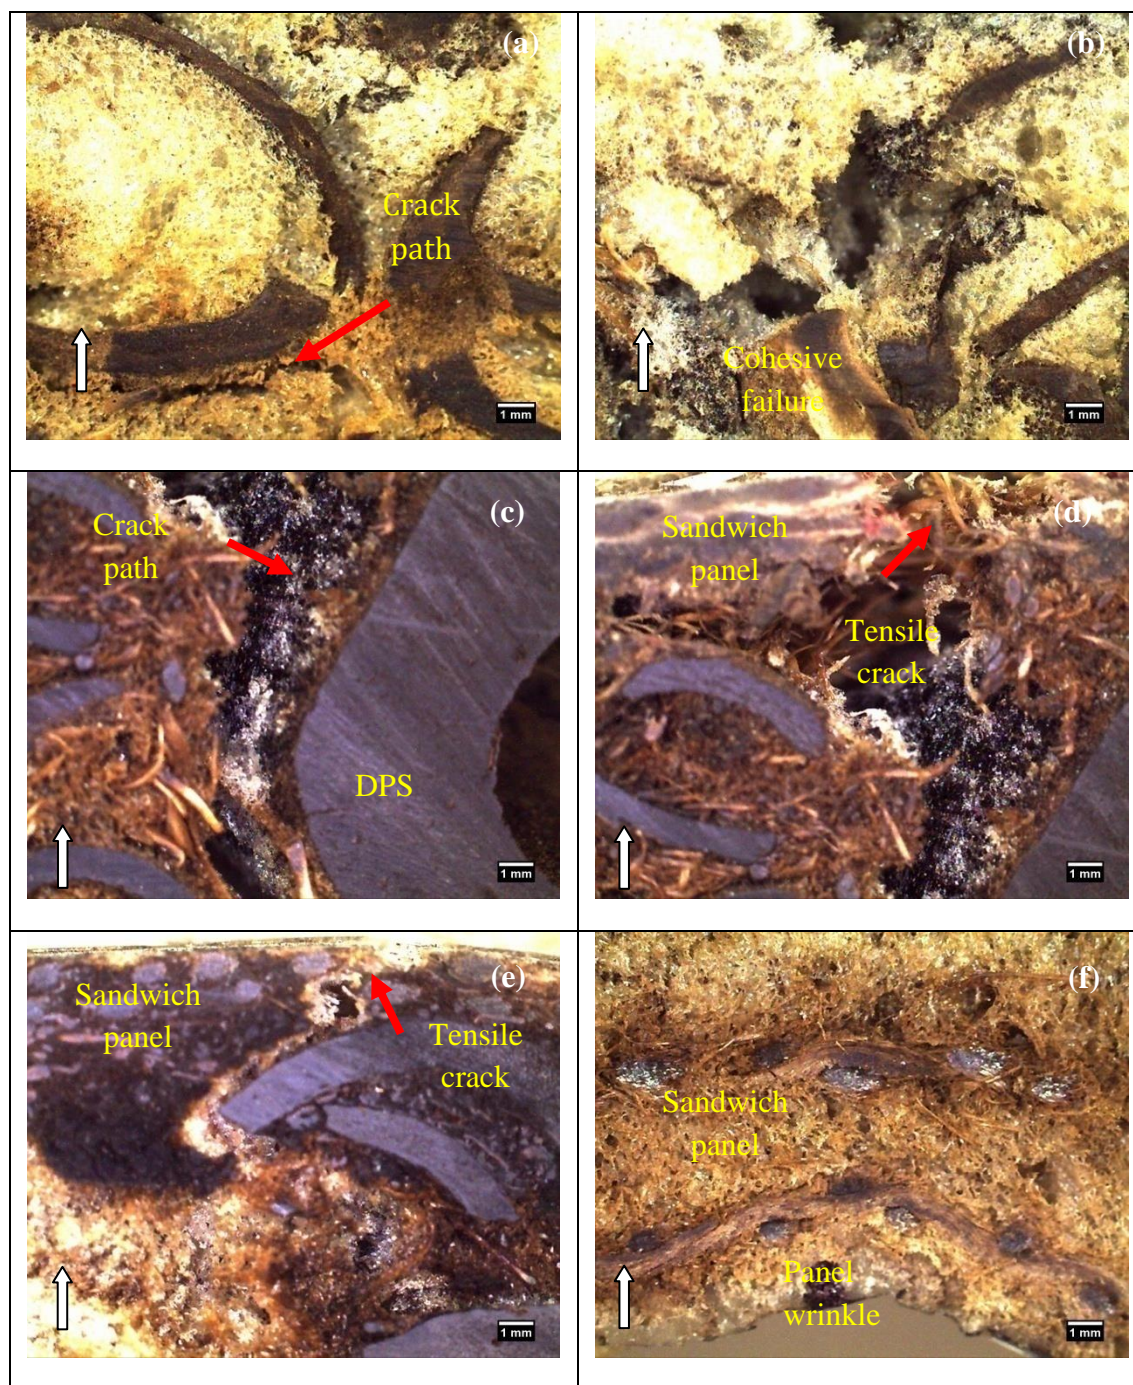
Fracture deformations of PU sandwiches after flexural test (a) Sandwich 100P: Crack path deflects by PKS; (b) Sandwich 100P: Shear core failure; (c) Sandwich 50P-50D: Crack path deflects by DPS caused cohesive failure; (d) Sandwich 50P-50D: Fractured of JWVE panel due to tensile crack; (e) Sandwich 25P-75D: Crack path from tensile crack deflect by PKS; (f) Sandwich 25P-75D: Panel wrinkle at loading roller;  $\uparrow$  : Flexure load direction
